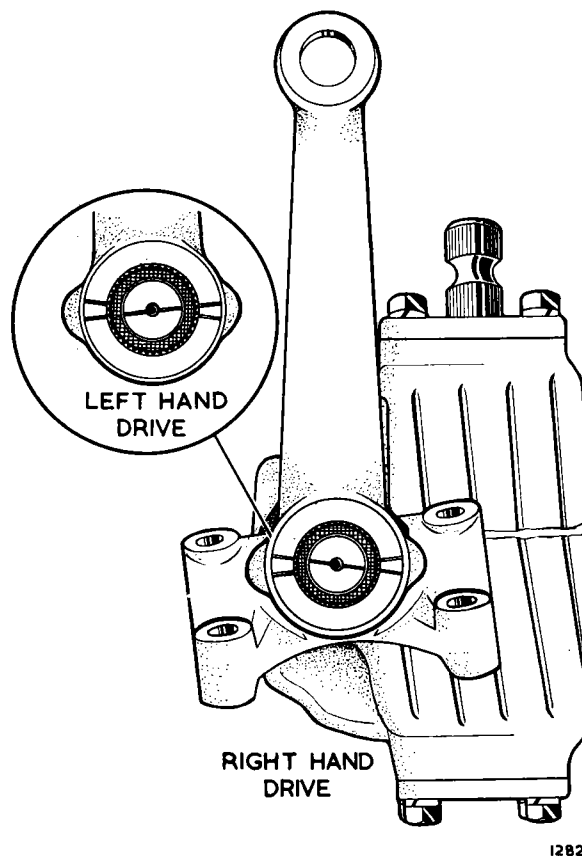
Showing the alignment of the drop arm/rocker shaft marks, both right-hand and left-hand steering
